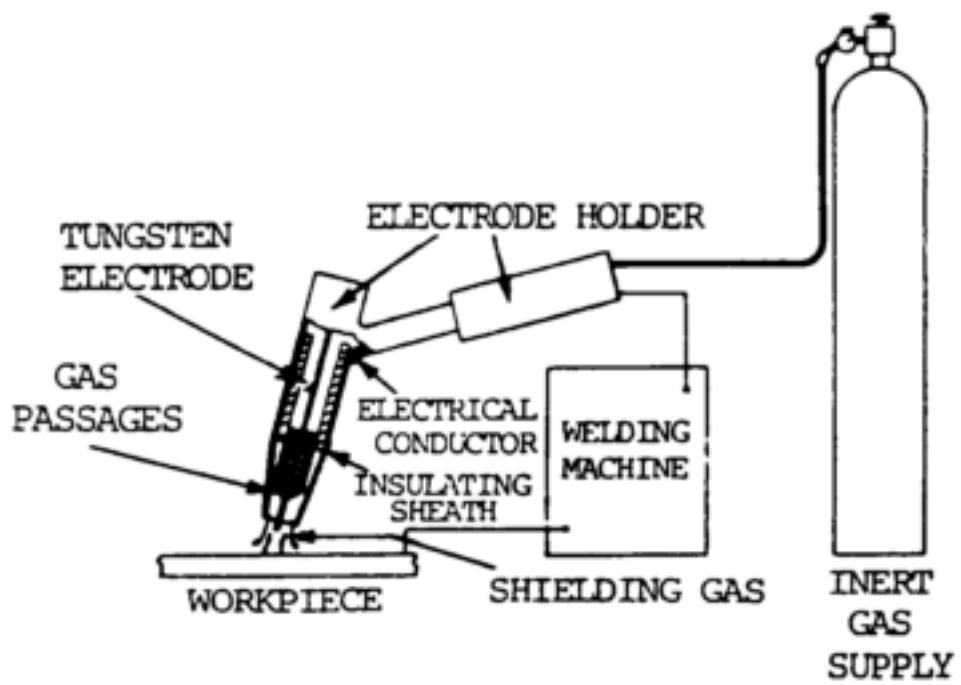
Gas tungsten arc (TIG) welding (GTAW).
